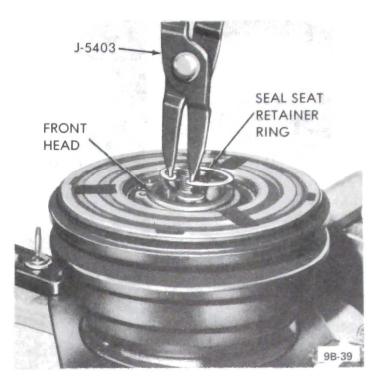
B-44 Removing or Installing Shaft Seal Seat Retaining Ring
